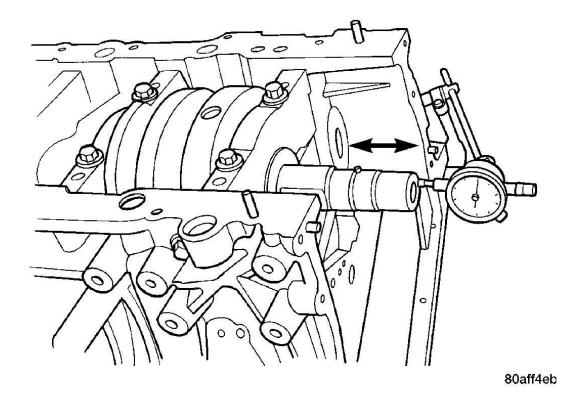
Checking Crankshaft End Play Courtesy of CHRYSLER LLC
